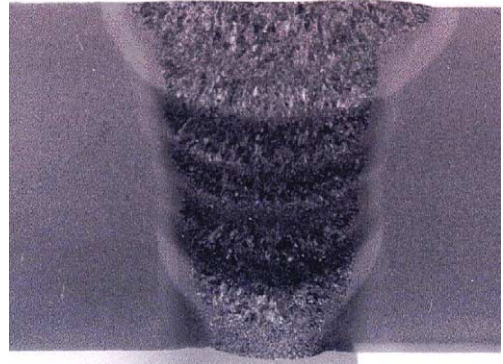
Macrograph of a Eurofer plate TIG weld, 24 mm thick.
